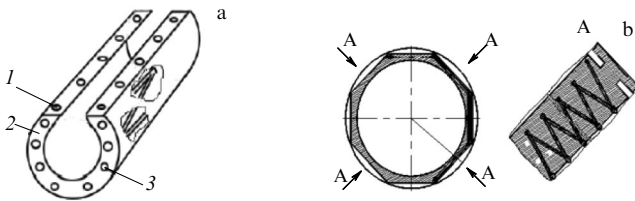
(a) Sketch of SHQF cavity with cooling channels: 1—holes for mounting electrodes, 2—cavity end face, and 3—welded channel out-puts; (b) location of cooling channels in container body.
